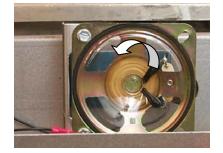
Rotate speaker bracket to the left until the assembly is below the surface of the fryer's top edge.
